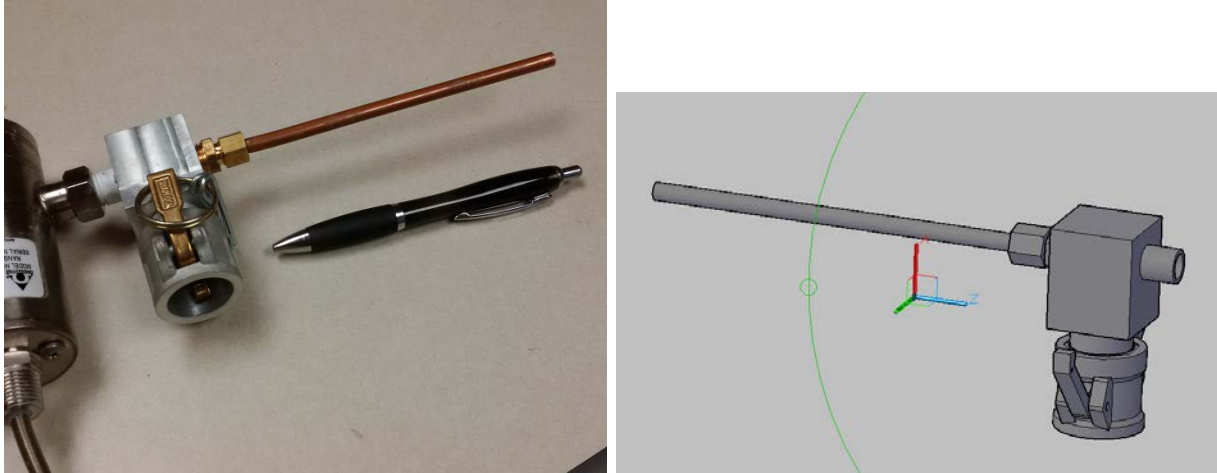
Discharge nozzle assembly that exits the enclosure through the side.
